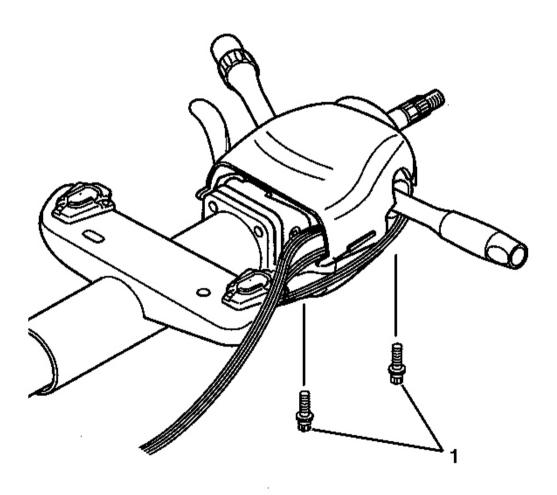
TORX(R) Head Screws & Lower Trim Cover Courtesy of GENERAL MOTORS CORP.
